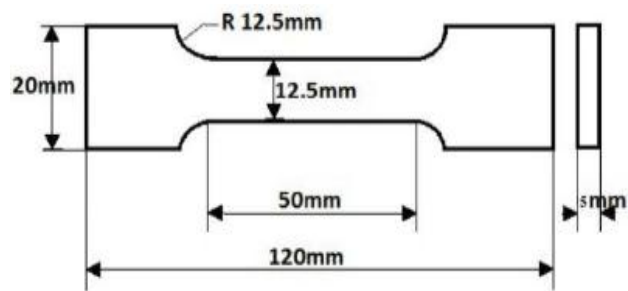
Geometrical drawings of I cross section ASTM- E8
